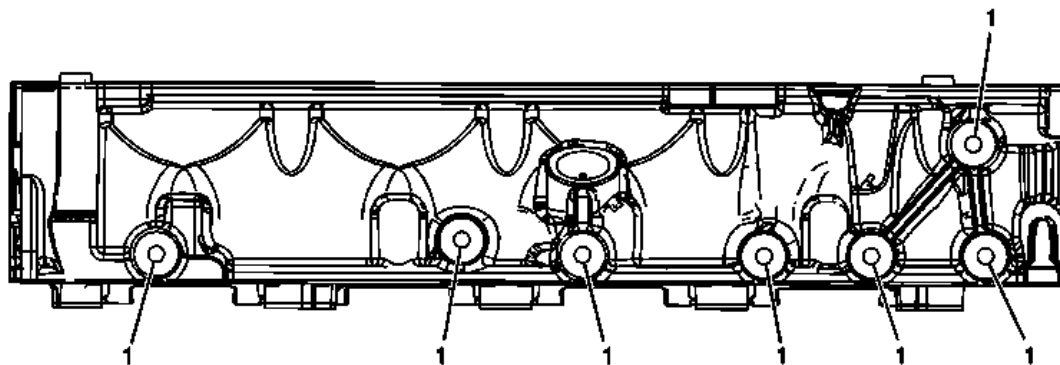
Identifying Bolt Size & Locations On Lower Crankcase - Right
